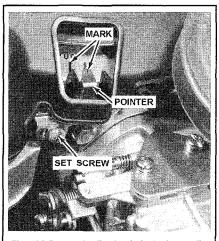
Rotate the flywheel clockwise until the dial indicator indicates the piston is at TDC (top dead center)
